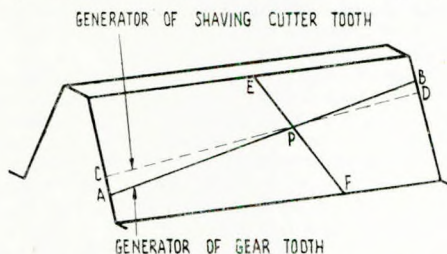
Relative position of straight line generators at point of contact of teeth of gears meshing with crossed axes
